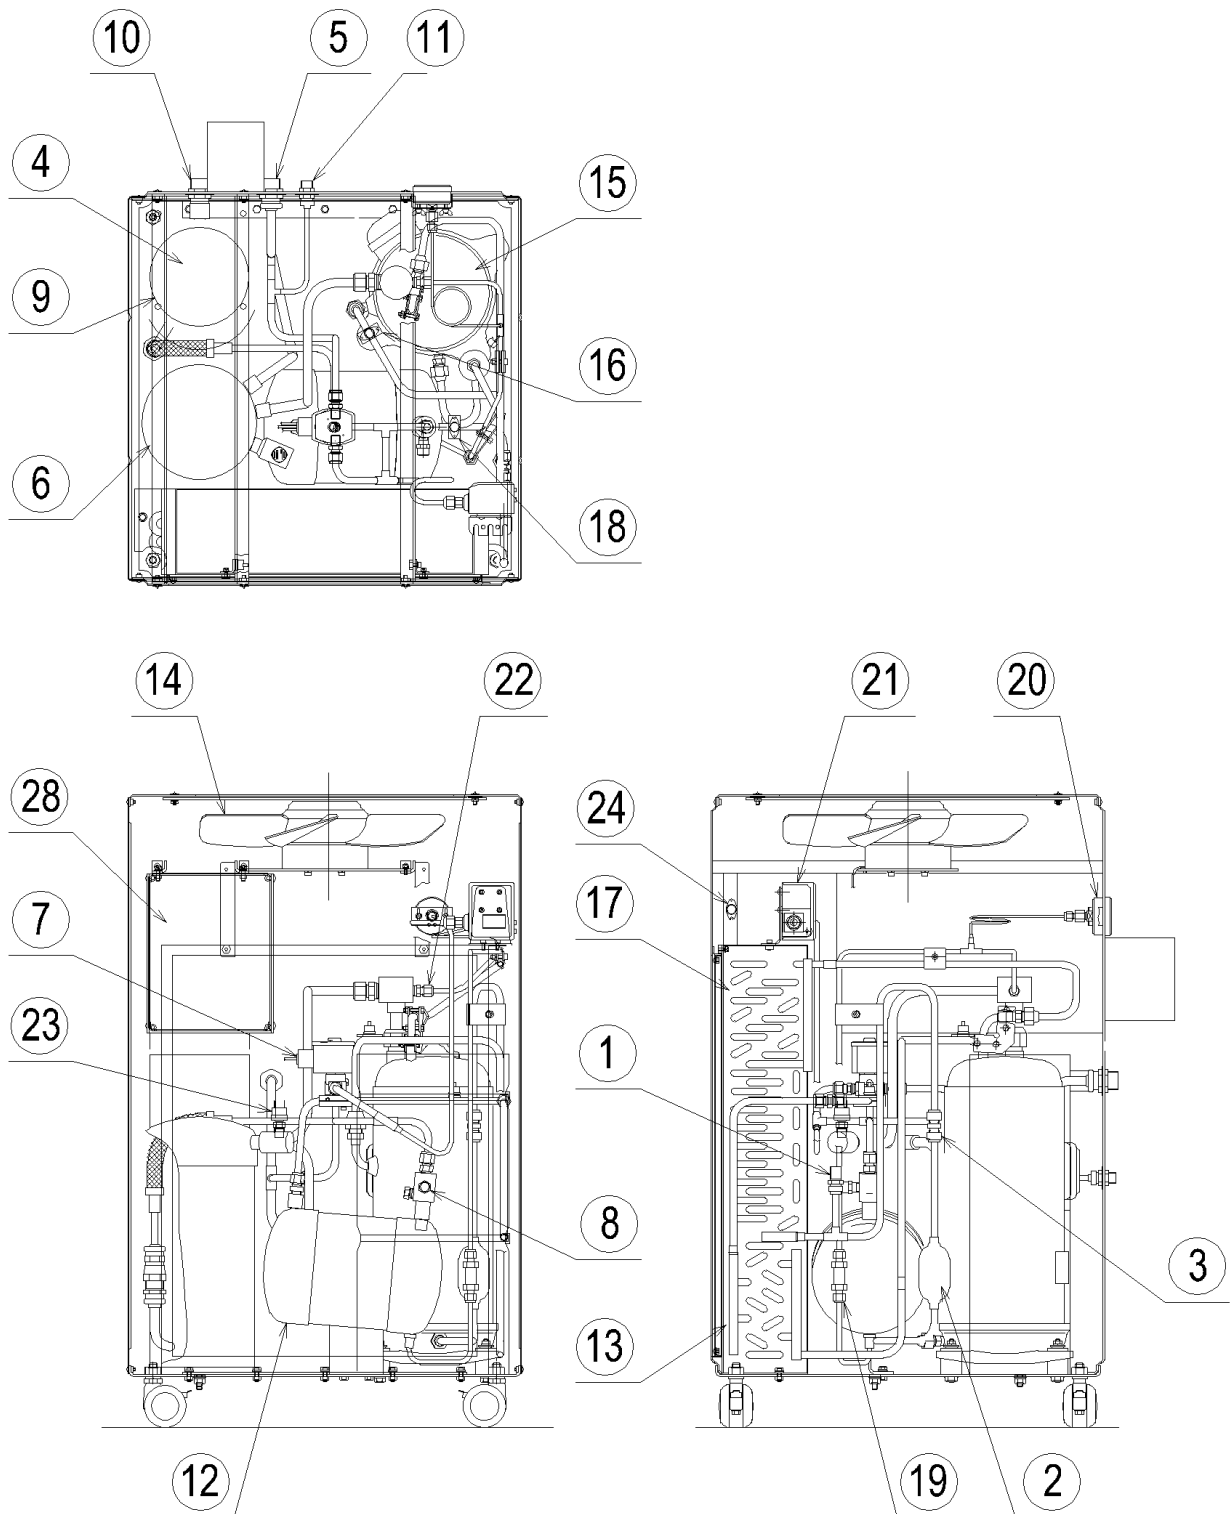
COMPONENTS OF CSA-71A COMPRESSOR UNIT
